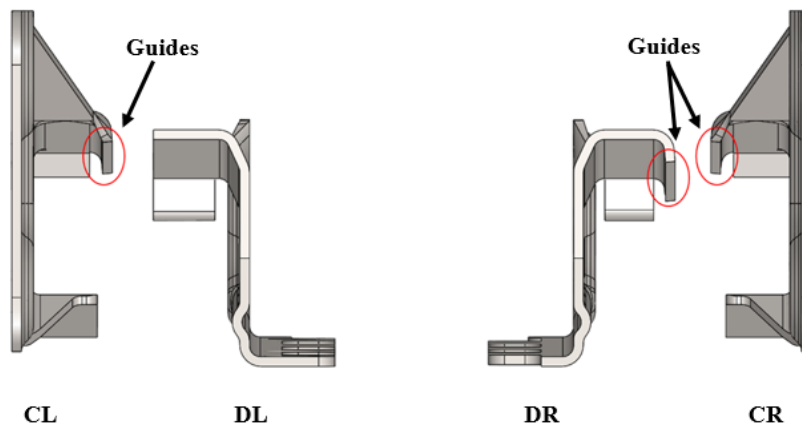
Side view of the four plates of BEACH POM and BEACH BEARING, showing the guides on CL, DR and CR.
